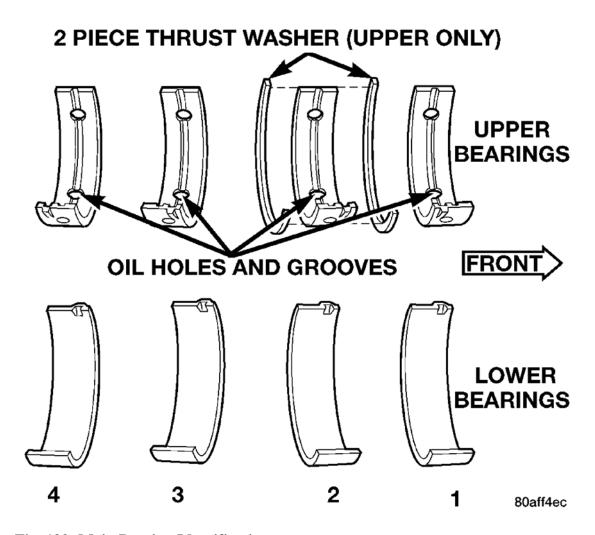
Main Bearing Identification Courtesy of CHRYSLER LLC
